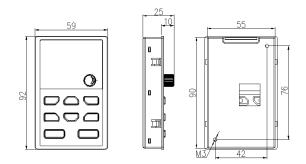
Keypad installation opening size 55\*90 (mm)
